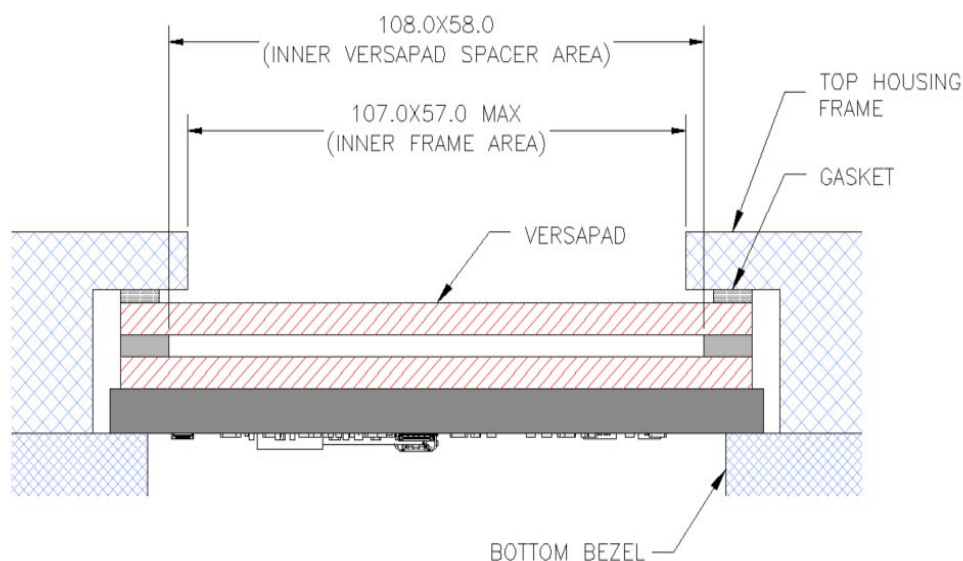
Side view of bottom side mounting. Drawing is not to scale
